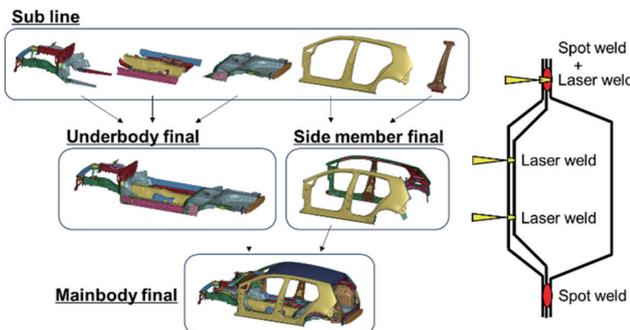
Examples of the combination of spot welds and laser welds using conventional production line
